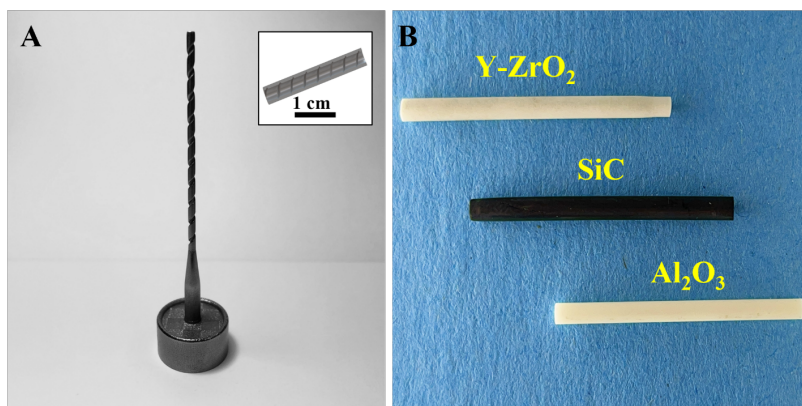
A.) Image showing the tooling component featuring a helical thread produced using direct metal laser sintering with the inset image showing a rendering of the cross-section of the geometry fabricated using this tooling. B.) SiC, alumina and yttria stabilized zirconia
